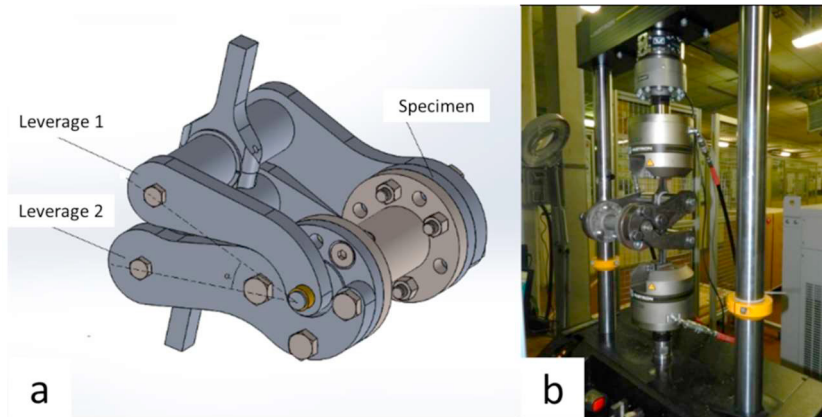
Testing device to apply torque to the spline coupling (a) and fatigue testing machine (b).
